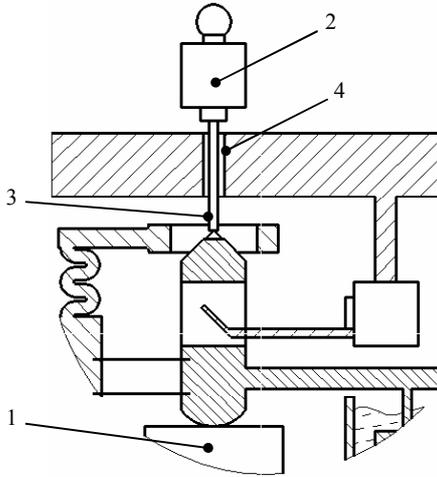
Calibration of the force transducer (1), using a calibration weight (2) in connection with a tracer pin (3) by utilizing the drill hole (4) in the thrust bearing
